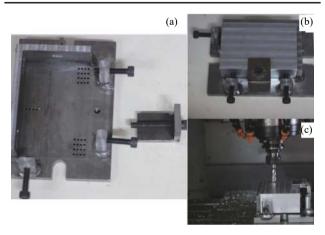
Specially designed fixture: (a) Fixture plate; (b) Prismatic block fixed in the fixture; (c) Actual machining on the prismatic component
